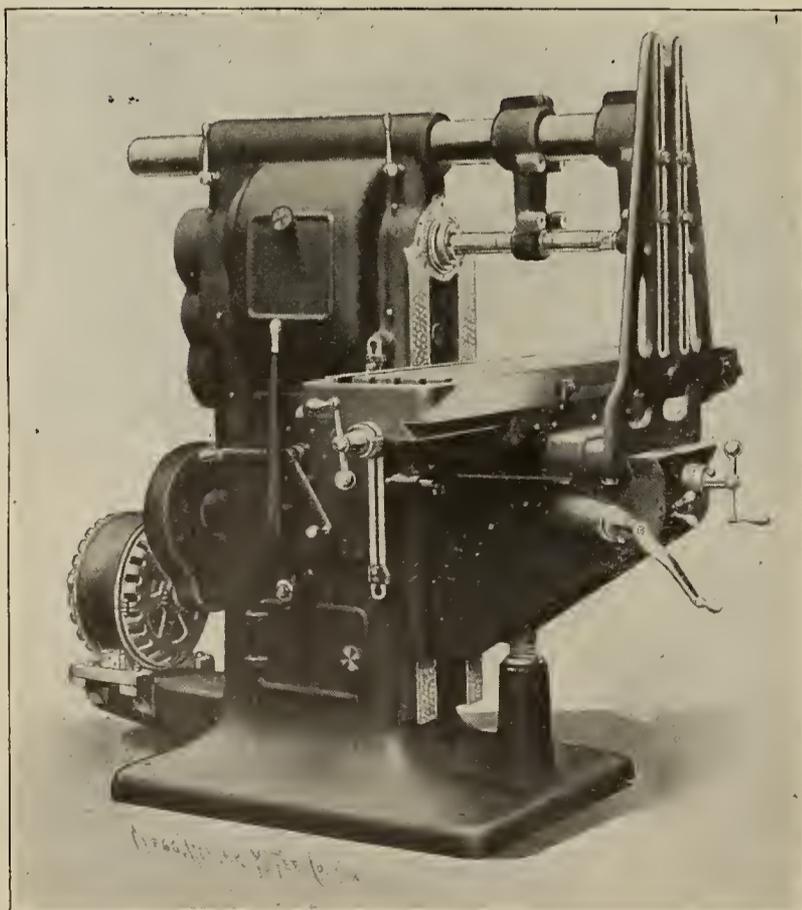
MILLING MACHINE WITH CONSTANT SPEED DRIVE.
